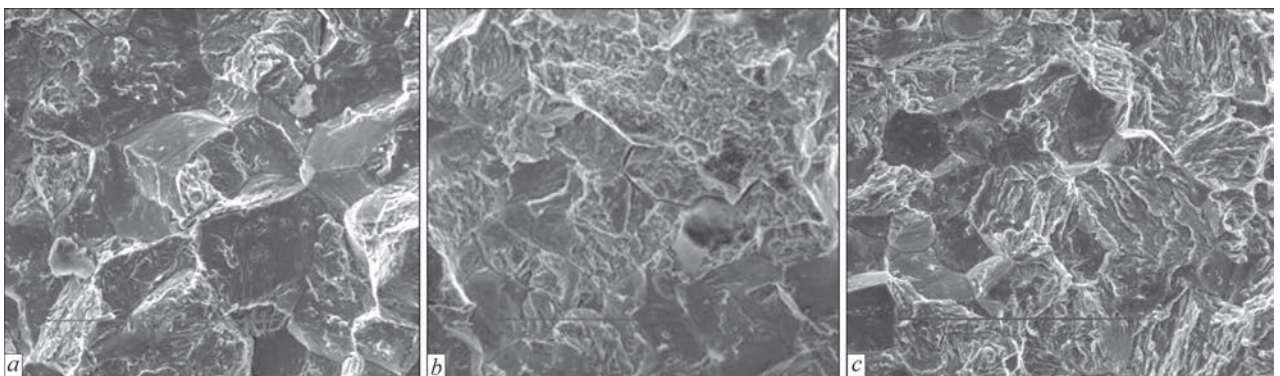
Characteristic fractures at delayed fracture of HAZ metal of steel 71 in welding with Sv-10GSMT wire ($\times 800$): *a* — $T_{pr} = 20$ °C; *b* — 100; *c* — 150
